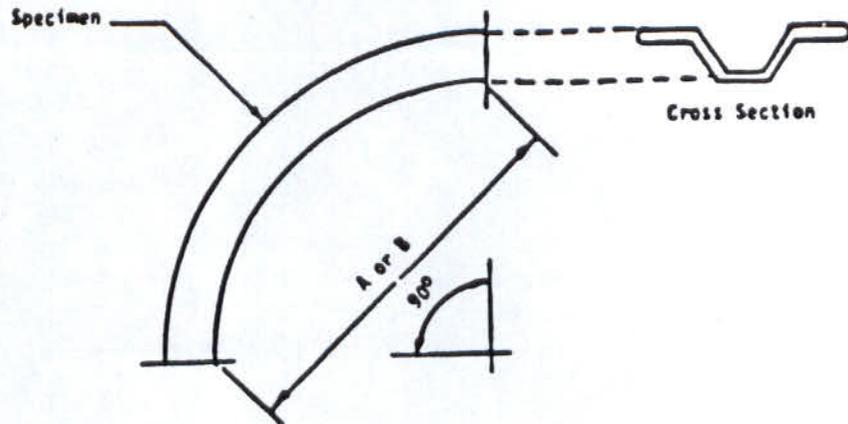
Specimen Configuration for Environmental Stress Cracking (Section 9.4.2).
